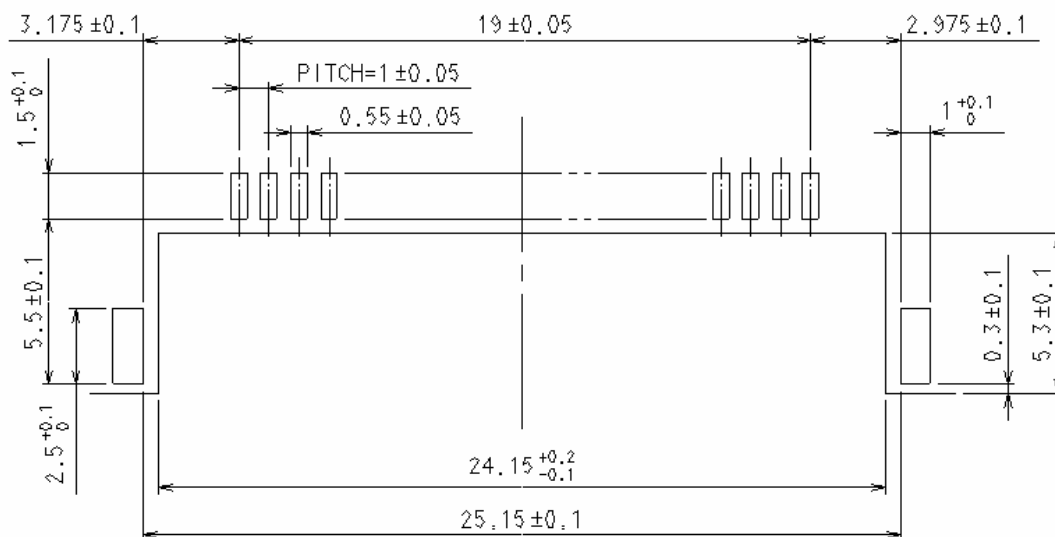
20 pin Panel-side Receptacle Connector PCB Mounting Pattern
